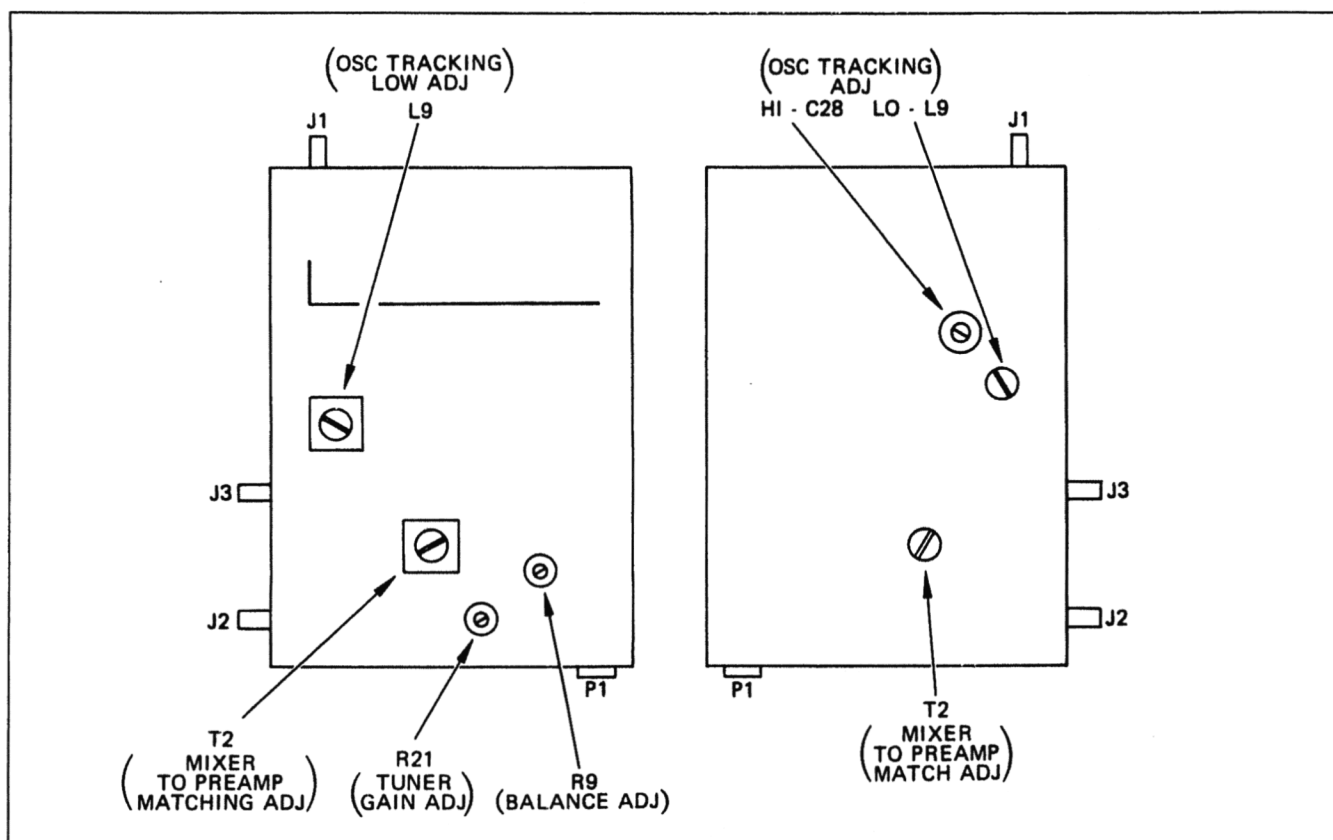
Trimmer Locations, Band 1 Tuner Assembly, A1
